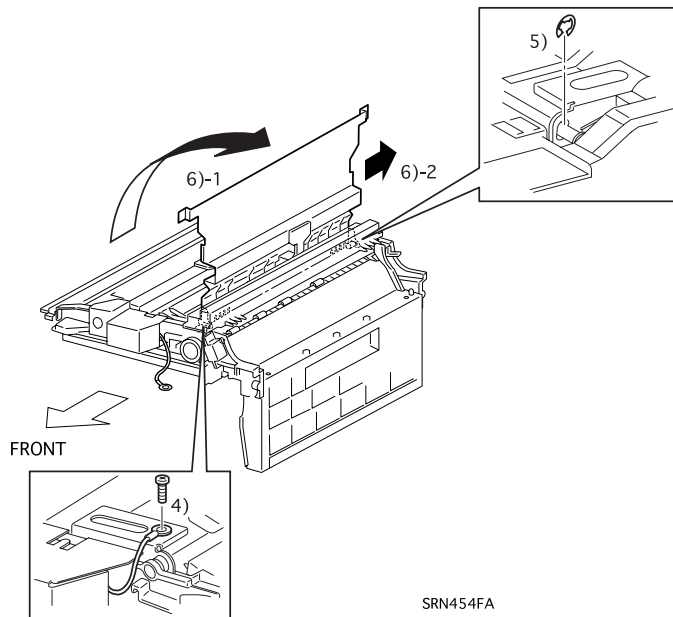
REGI. CHUTE ASSEMBLY Removal (1/2)
